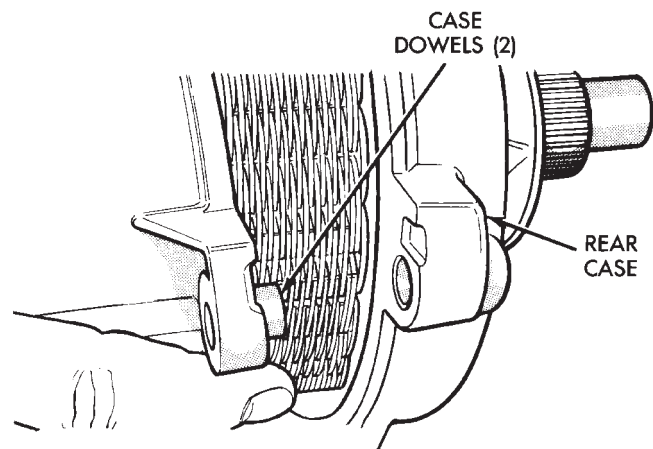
Loosening Rear Case (Breaking Sealer Bead)
